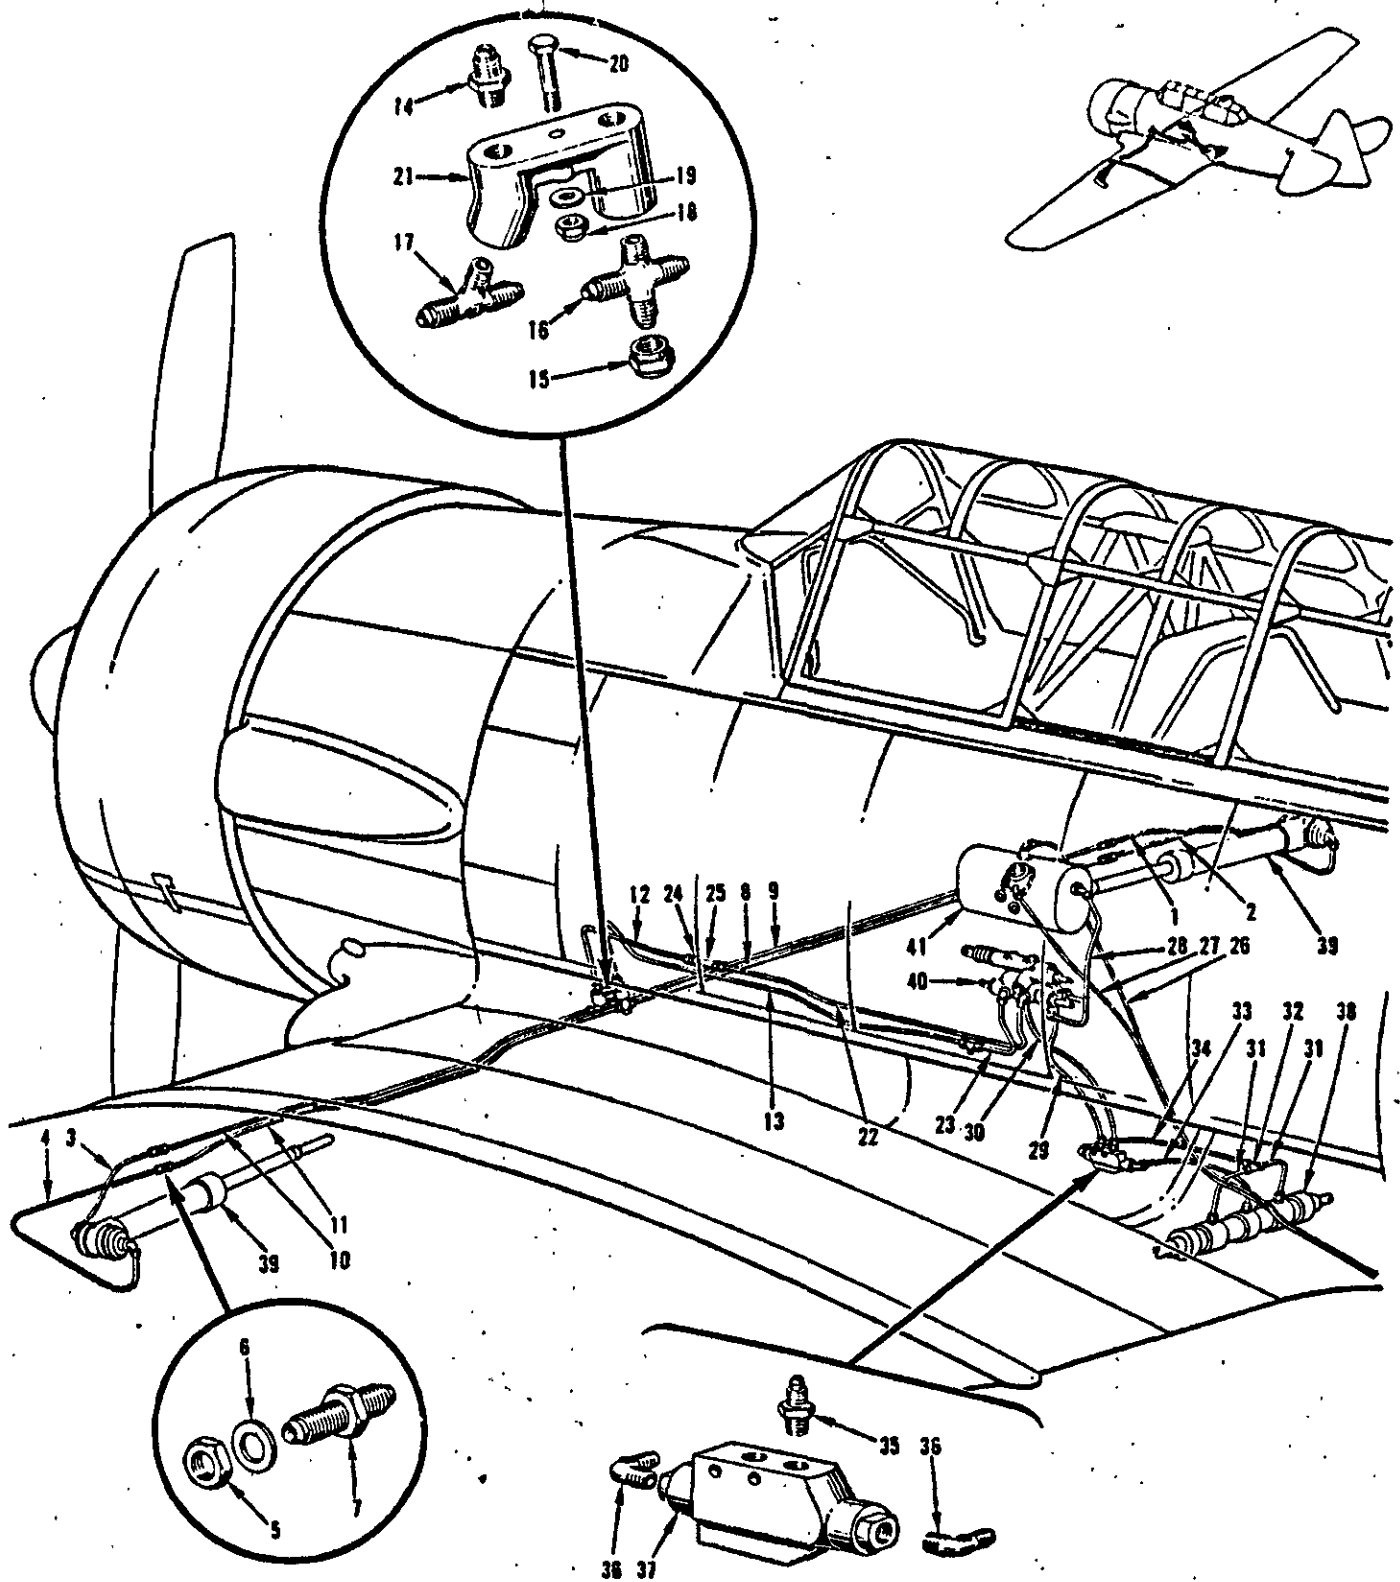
HYDRAULIC RESERVOIR AND SELECTOR VALVE EQUIPMENT										UNITS PER ASSY.	APPLICATION CODE
